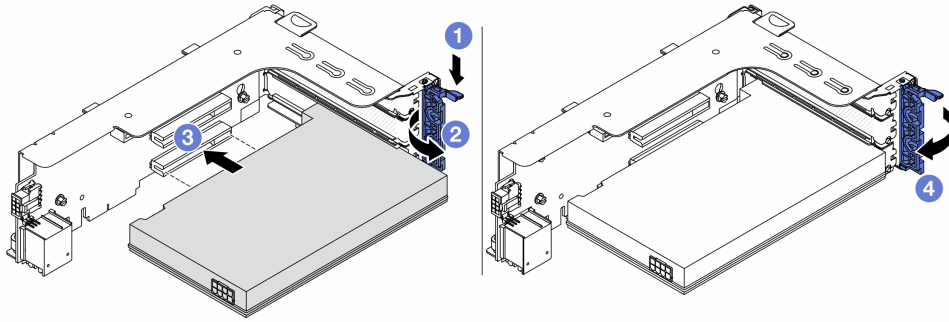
Installing the PCIe adapter to the riser 1 or 2 assembly
